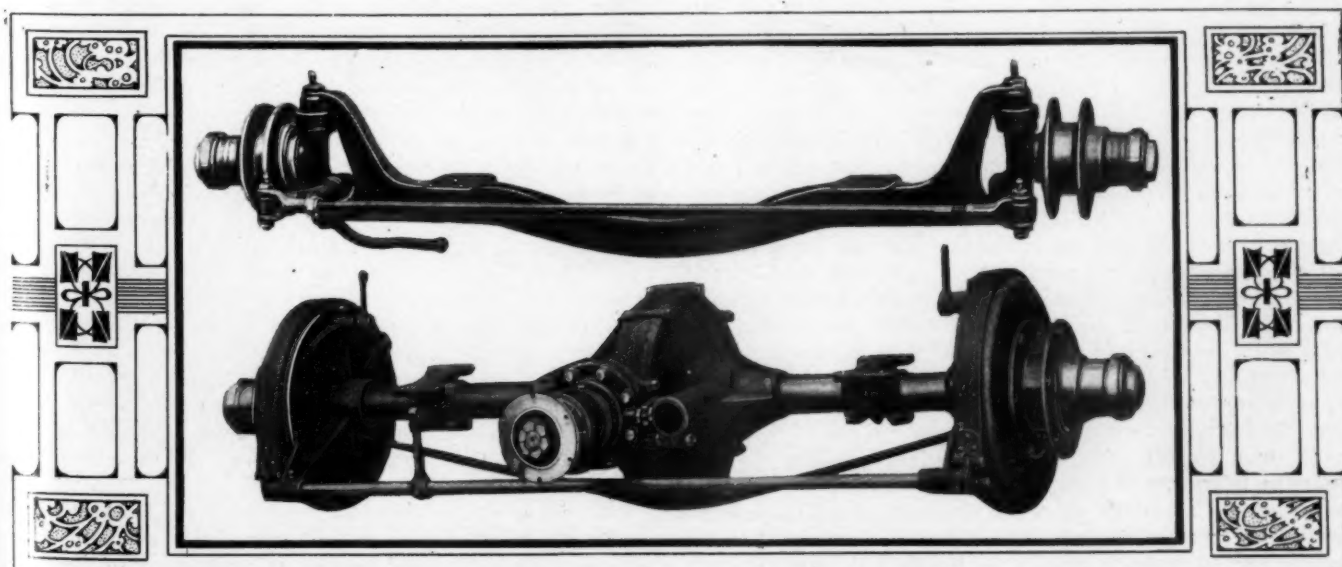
Front and rear axles, both of standard design; the former an I-section forging, the latter of the floating type.
